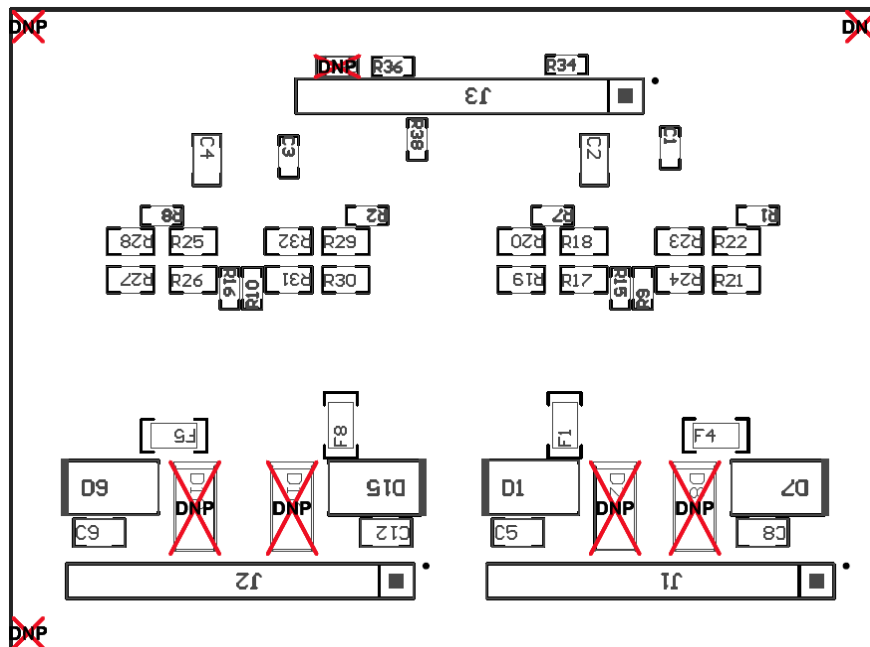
TPS23861EVM-613 (Daughterboard) Bottom Side Assembly
